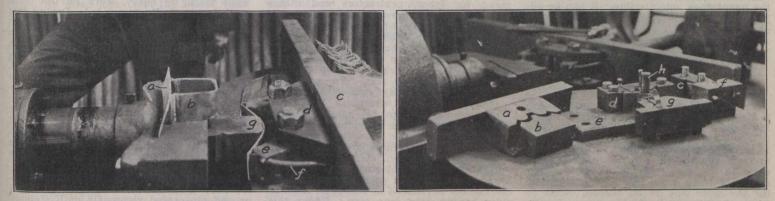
Forming Straddle Member of Superheater Tube Clips. Fig. 3.—Dies for Forming Inner and Bottom Members of Superheater Tube Clips.
